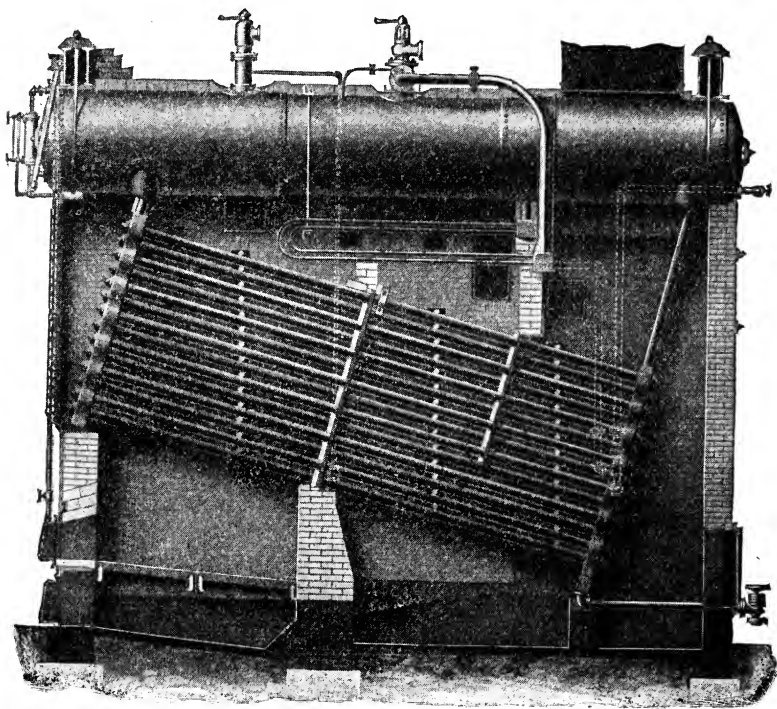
,692.—Babcock and Wilcox sectional *parallel* horizontal boiler with wrought steel inclined headers. The heating surface is composed of *tubes* expanded into headers of serpentine or sinuous form, which dispose the tubes in a staggered position when assembled. The headers may be either inclined as shown or vertical. The sections are attached at their rear lower end to a transverse mud drum which is tapped for blow off connection. The boiler is suspended by front and rear wrought steel supporting frames independent of the brick work to permit expansion and contraction without showing either the boiler or brick work. The feed water is introduced through the front drum head. From this point of introduction the water passes to the rear of the drum, downward through the rear circulating tubes to the sections, upward through the tubes of the sections to the front headers and through these headers and front circulating tubes again to the drum where such water as has not been formed into steam retraces its course. The steam formed in the passage through the tubes is liberated as the water reaches the front of the drum. The steam so formed is stored in the steam space above the water line, from which it is drawn through a so-called "dry pipe."
